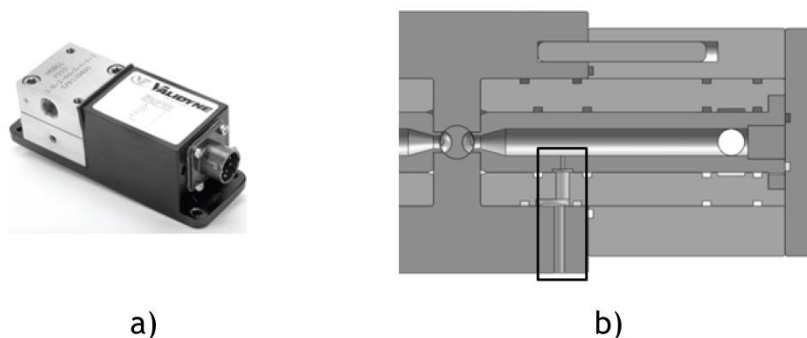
a) PTS Validyne P55, b) Model Cad of pressure tip, over the different parts
